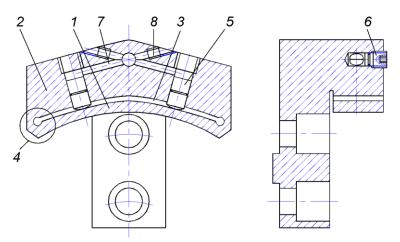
Clamping jaw with elastic compensation links for clamping thin-walled parts with cylindrical base surfaces
